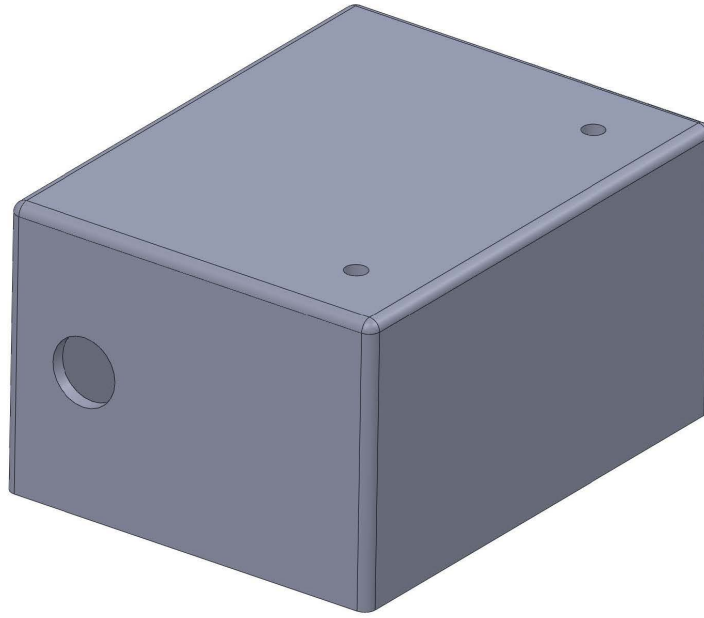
3-D model of housing for PCB and thermocouples.
